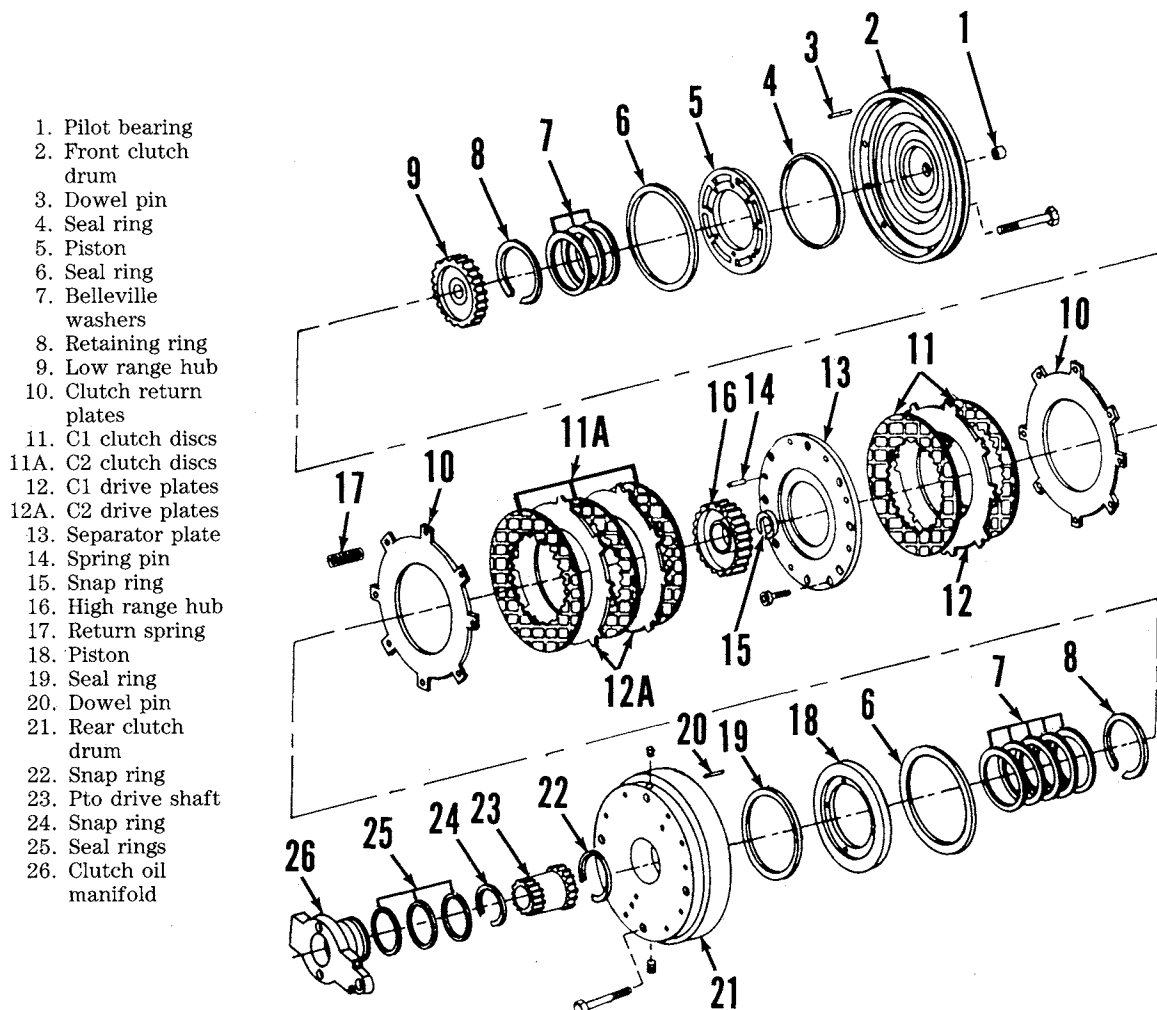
Exploded view of C1 and C2 traction clutch assemblies used on Power Shift models.
